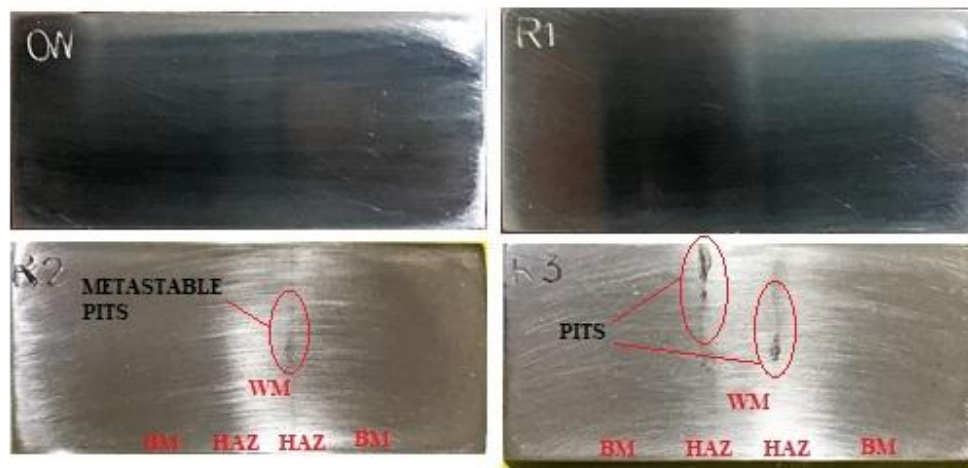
Specimens of repeated TIG welding after gravimetric tests
